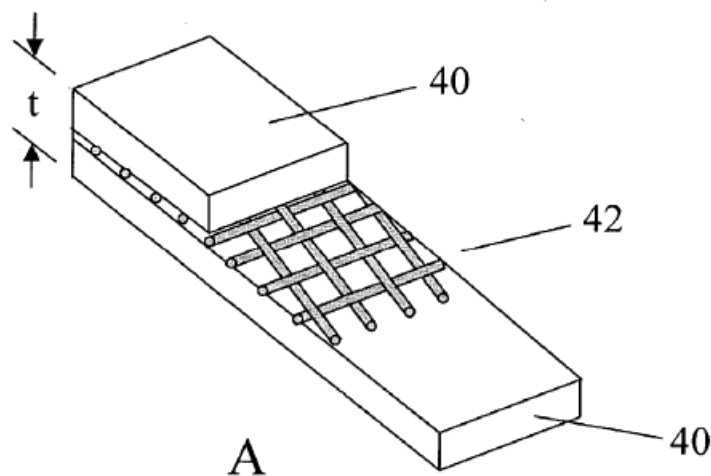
A is a schematic cutaway view of a three-layer construction of a swimming pool’s flexible side wall or side wall panels. Ex. 1003 ¶¶ 13, 19.
